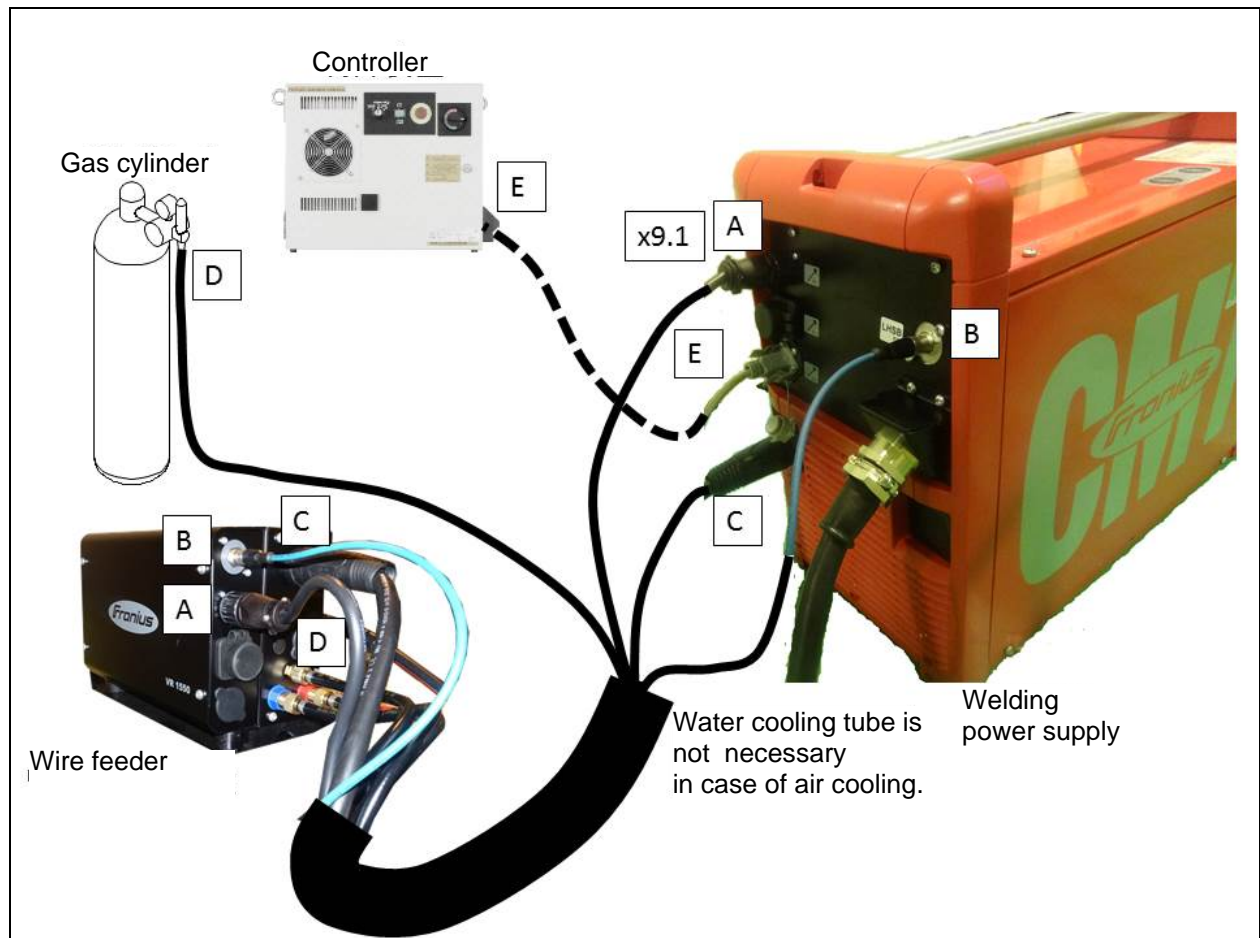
(a) Connection of welding power supply
